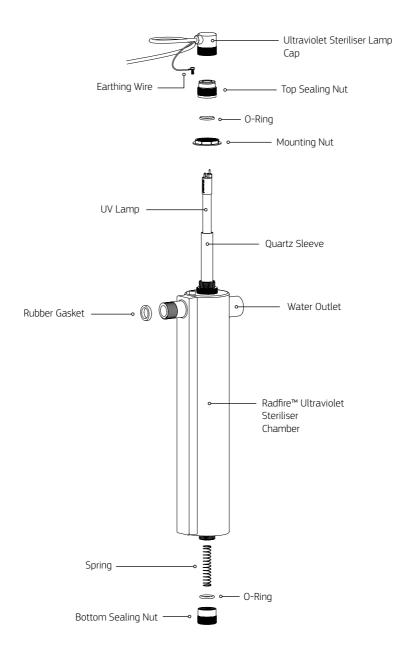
Radfire™ Ultraviolet Steriliser Parts Diagram, Exploded View
